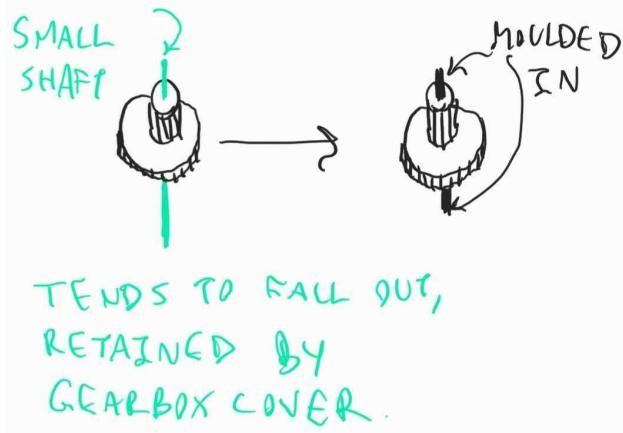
Sketch of the Small Shaft and Gear Modification
